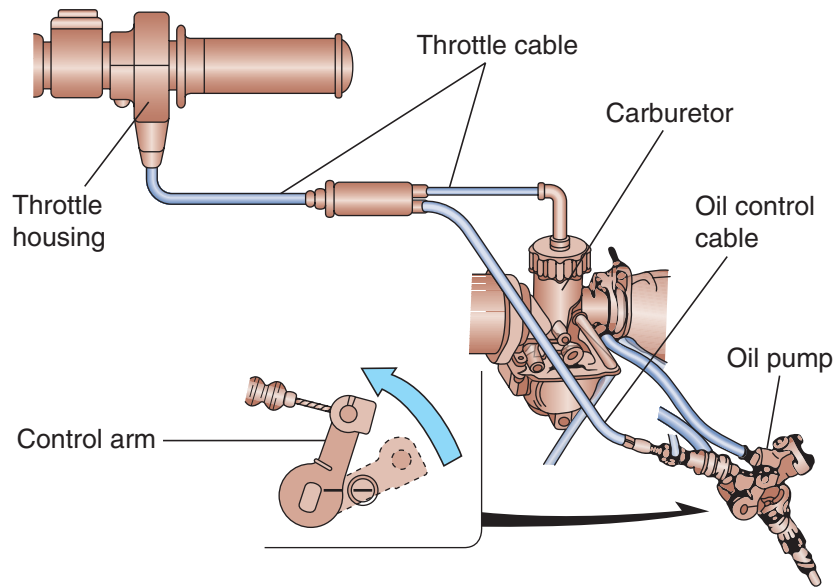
The throttle cable controls the oil-injected two-stroke engine oil pump.
